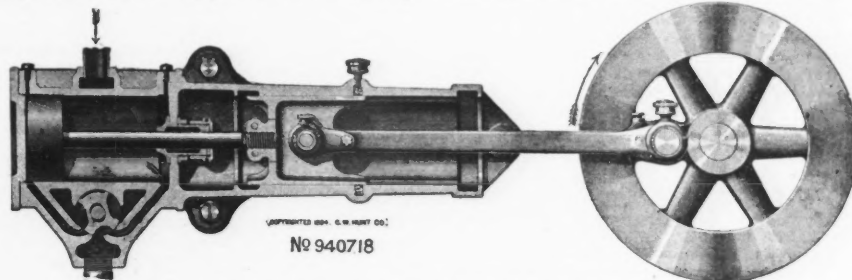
LONGITUDINAL SECTION OF ENGINE FOR COAL CRACKER.
